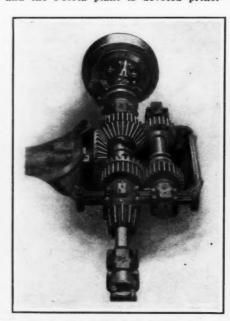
Master Clutch and Transmission Assembly of 75-horsepower Tractor
